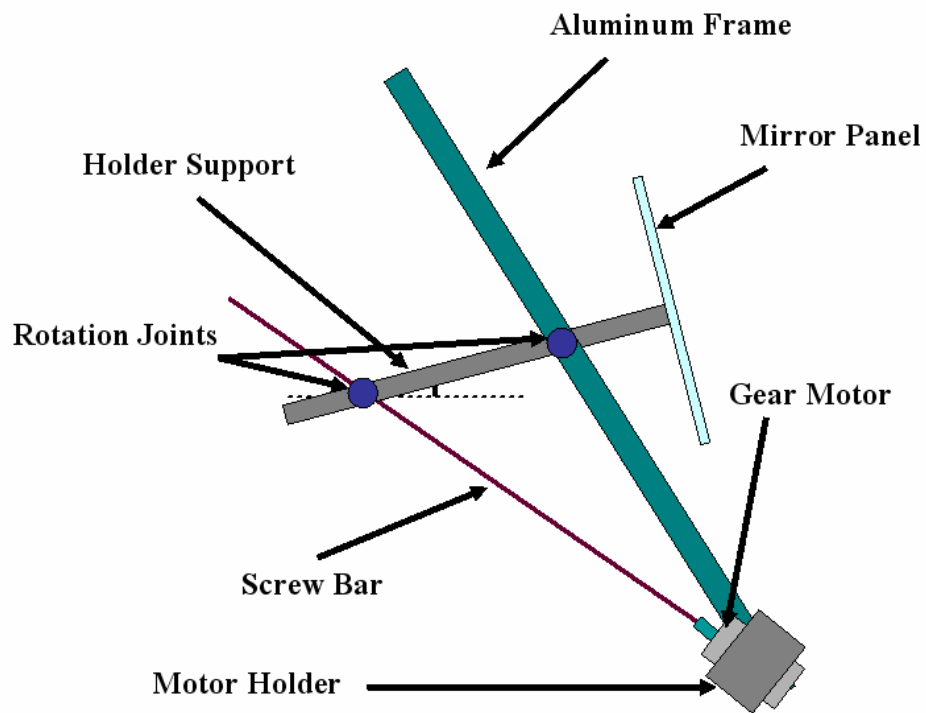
Mirror unit controlled with a gear motor (Side view).
